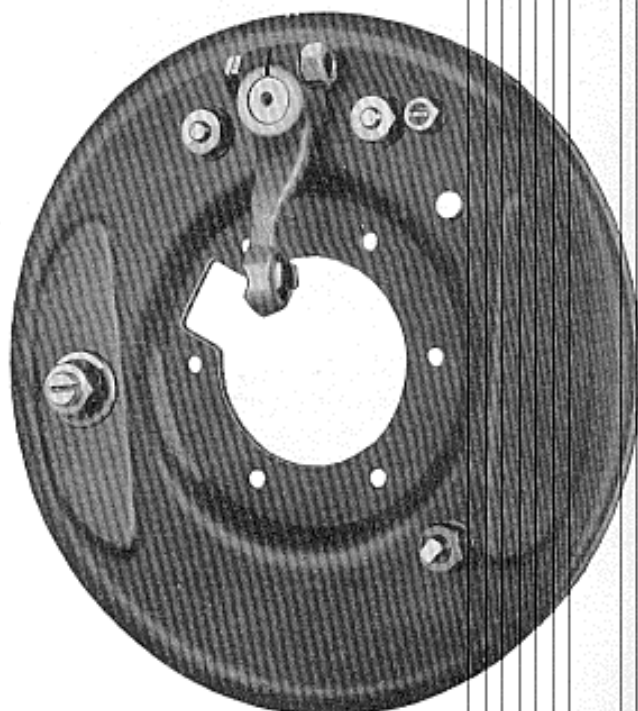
Frame side of the backing plate for same model brake as shown in Fig. N2
